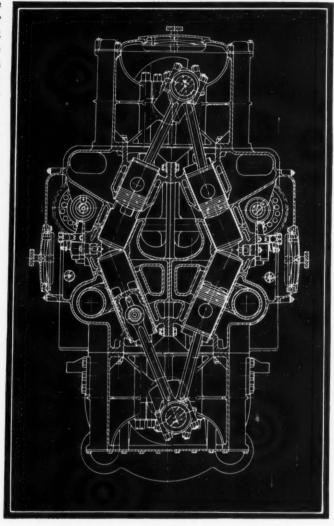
Cylinders are arranged in shape of diamond around center of engine. Note injection nozzles and fuel camshaft at each side
